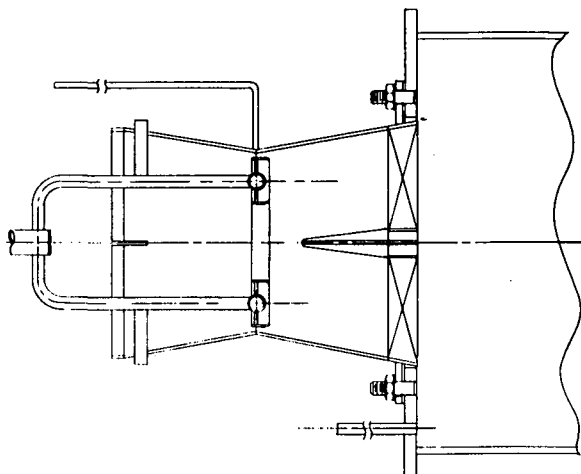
Combustor Test Configuration — Spray-Ring Injector
